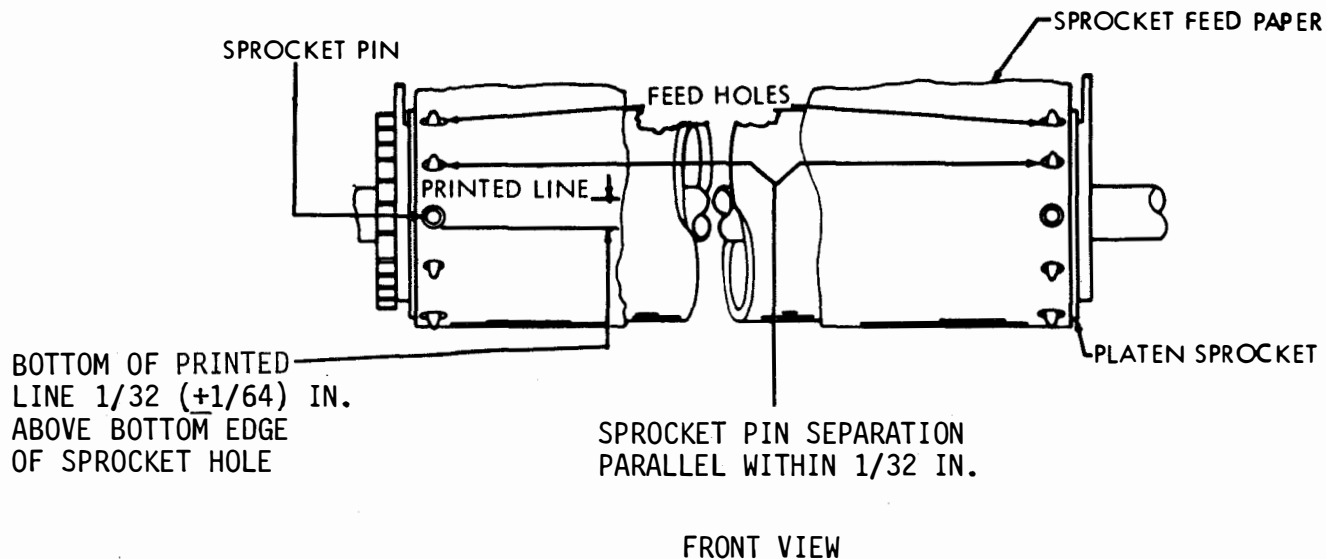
Printer Line and Sprocket Pin Separation (Sprocket Feed)
